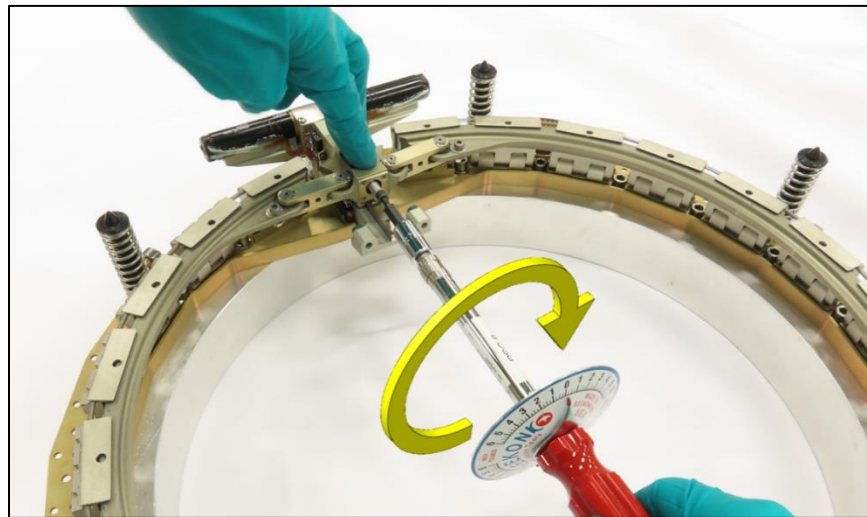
Rotating ball screw to allow Sliding Tube travel
